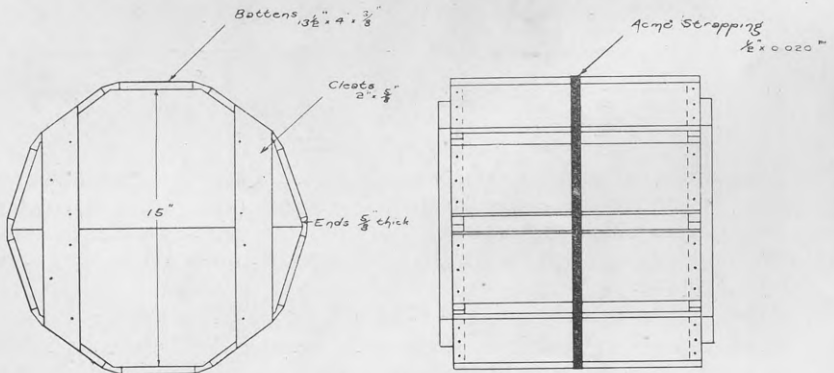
CLEATED CRATE TO HOLD ONE 80 LB. CHEESE.
